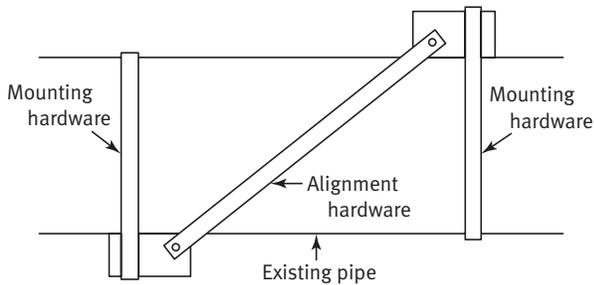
Transducer Assembly Mounted Outside of an Existing Pipe
